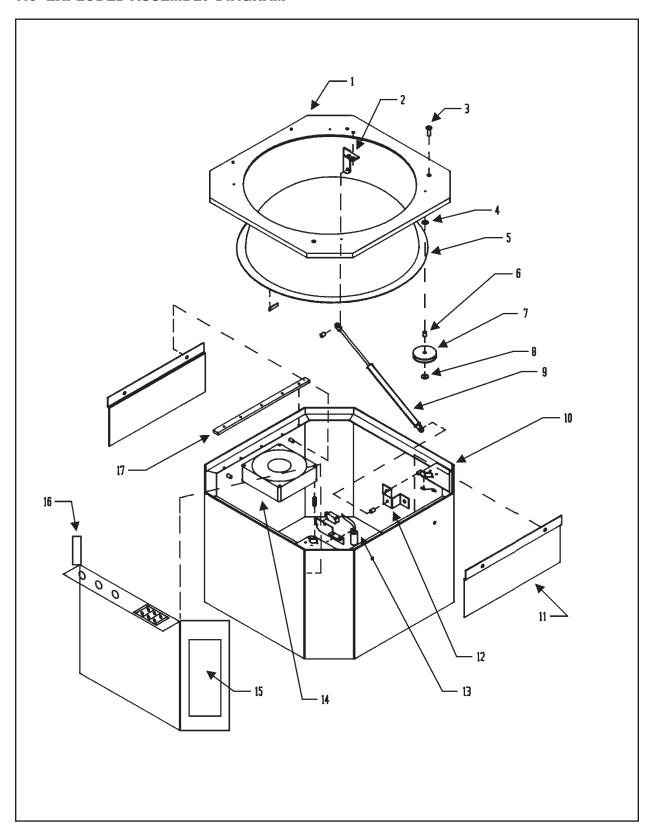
ED25/ED26/ED27 Series Enclosure Exploded Assembly Diagram
